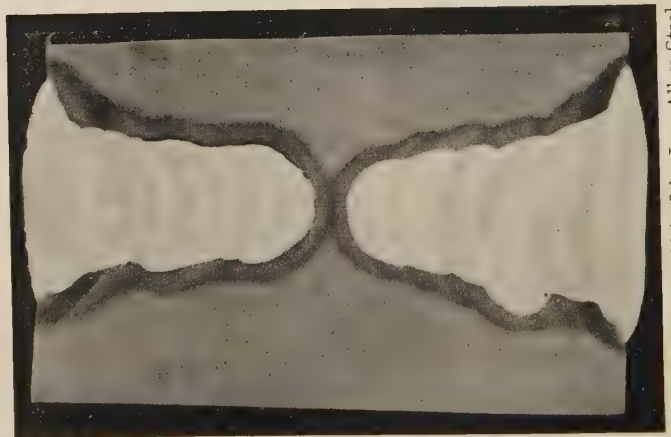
Butt Weld in 3-in. Low-Alloy Steel Plate, using stainless-steel electrodes, showing interfacial defect.
